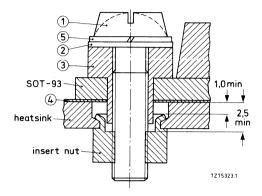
Assembly and heatsink requirements for 500 V insulation. See also Fig. 3.
